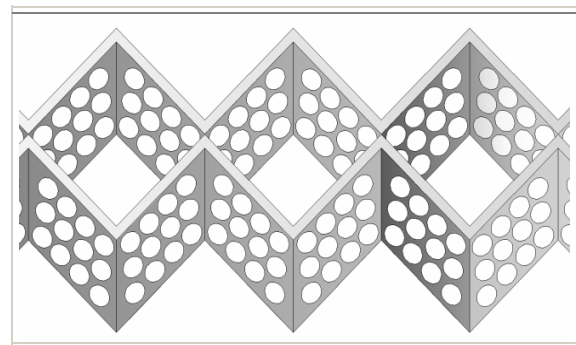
Scheme of perforated tape forming before resistance welding
